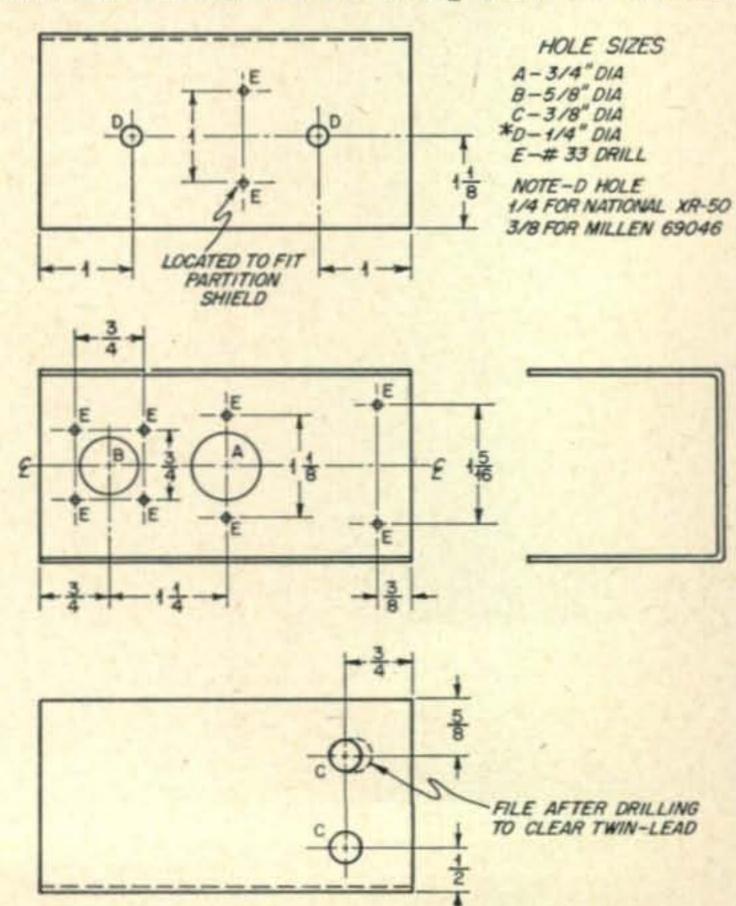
Chassis layout plan on the Bud "Minibox." The mating section is mounted on your converter.
